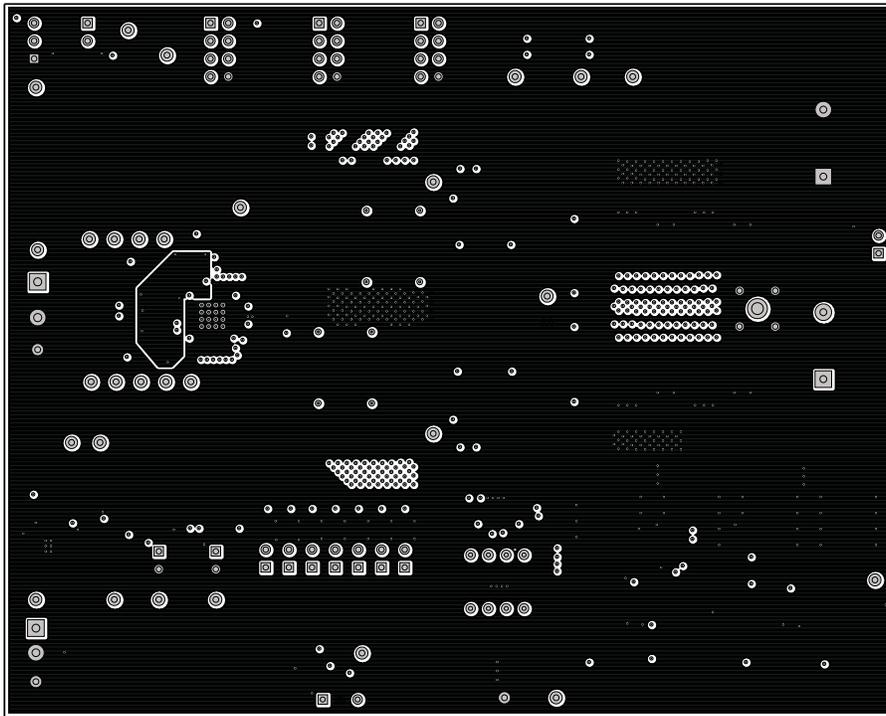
TPS51621EVM-602 Internal Layer 2, Top View
